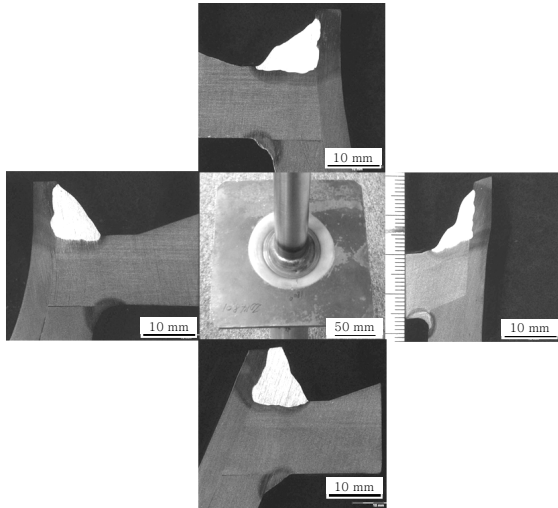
Cross sections of weld parts after J-Groove overlay welding
